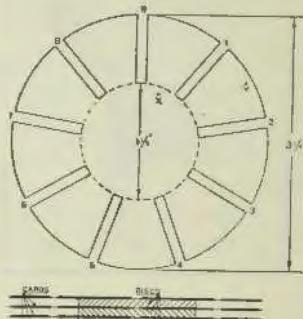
The upper figure gives the dimensions for the cards. The lower figure shows the cards and cardboard separators assembled.
